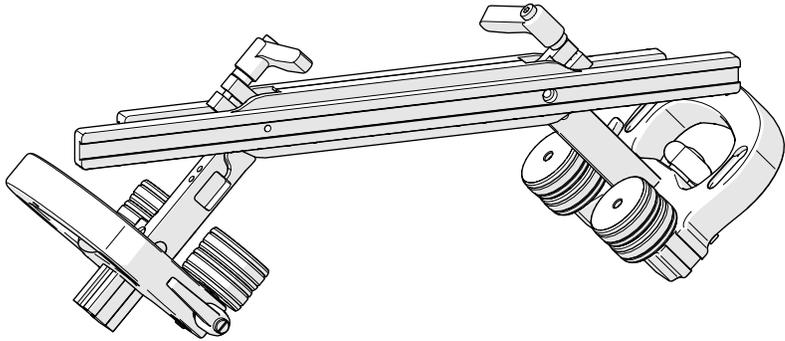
Wheel block with handle, wheels facing inward, positioned to innermost measurement increment
